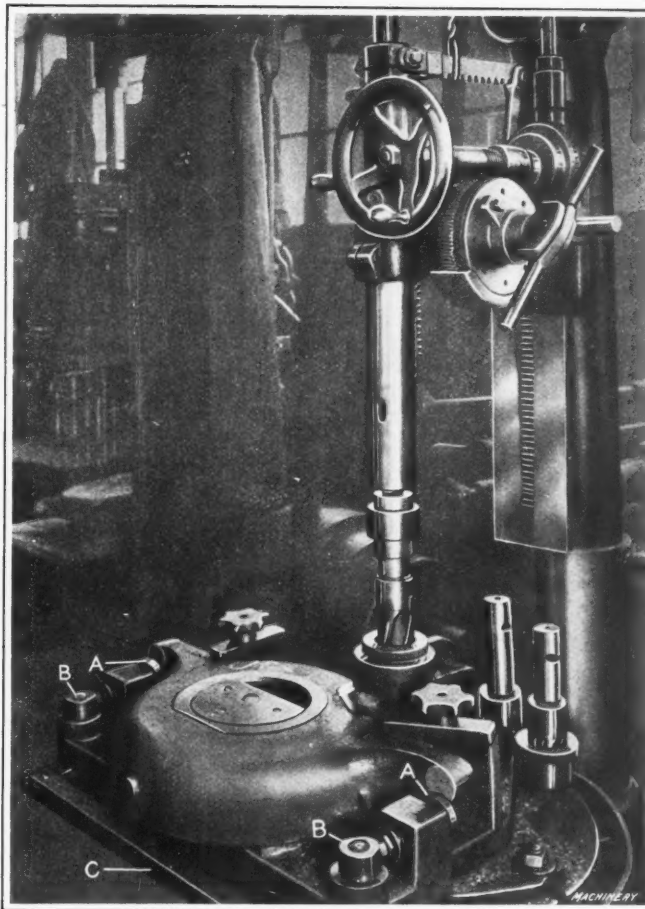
Reed-Prentice 26-inch Upright Drill equipped with "Magic" Quick-change Chuck, Tools and Jig for boring, reaming and chamfering Hole for Starter-box Bearing on Flywheel Housings
